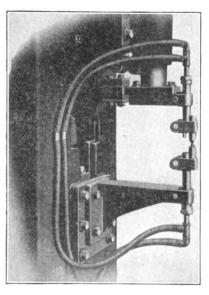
Details of Spot Welder Courtesy of Toledo Electric Welder Company
